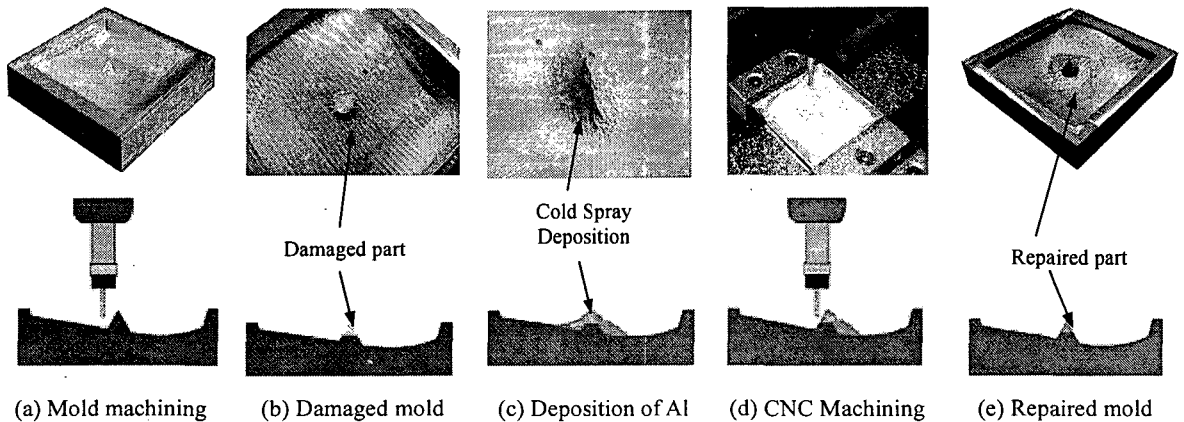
Process of repairing mold by cold spray deposition and mechanical machining
